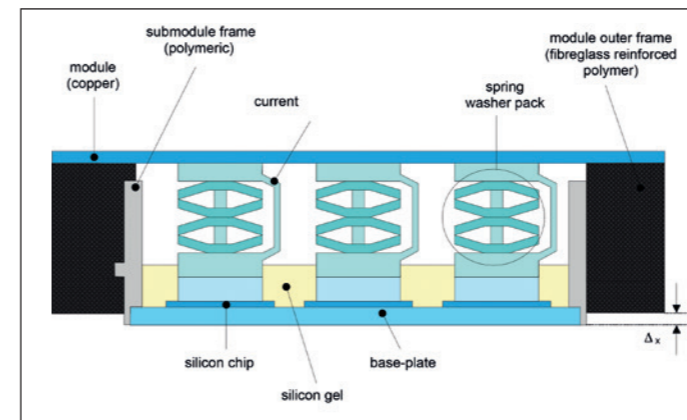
Sectional view of ABB multichip press-pack with individual spring contacts: the chip bears the force determined by the spring; excess force is borne by the housing walls. The drawing illustrates one multichip submodule in one press-pack housing.
